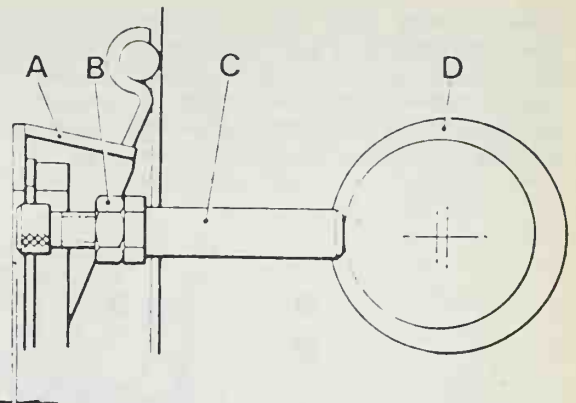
View of lift pump adjuster used on HR engines. Push rod clearance (E) is 0.018-0.020 inch.
